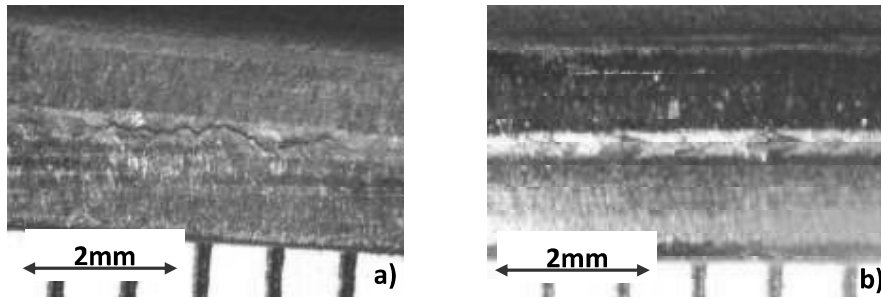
a) Crack found in the surface weld joint and b) Solidification with diamond pattern on the fusion zone near of the cracks.
